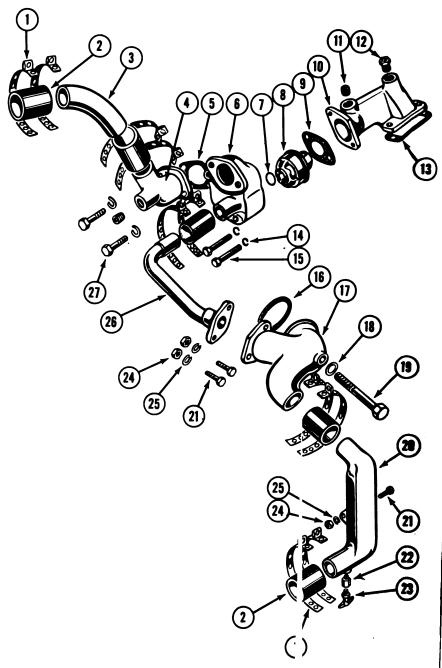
Exploded view of cooling system, jacke 1, and connections.
